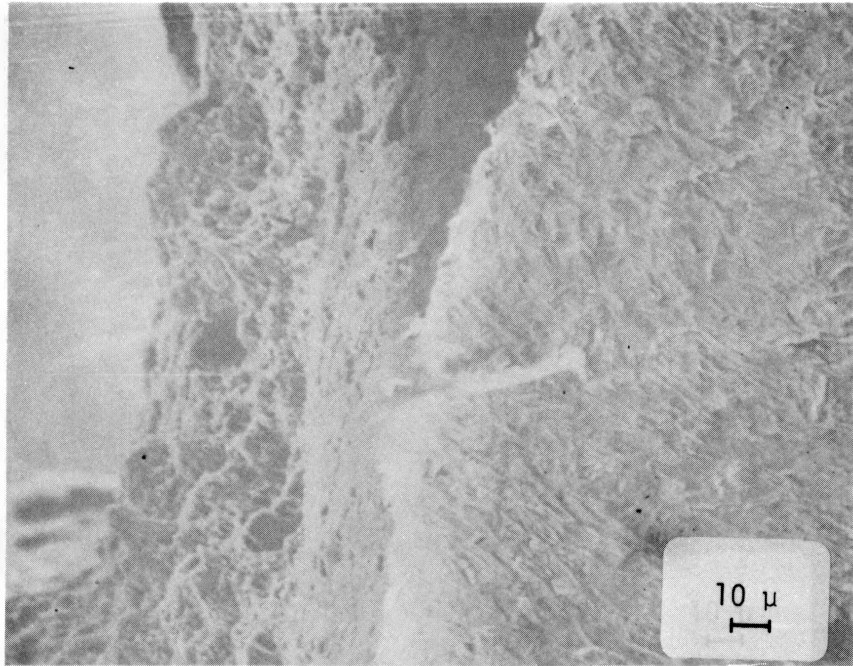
Intersection of wear and fracture surfaces of a martensite specimen (4-38; 342,250 cycles) - fretting fatigue in air.
